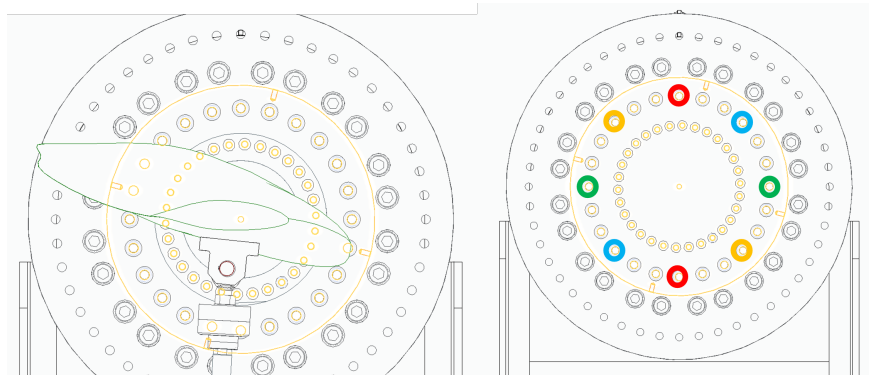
Blade Connection to the Interface Plate with Colours Representing the Bolt Tightening Sequence
